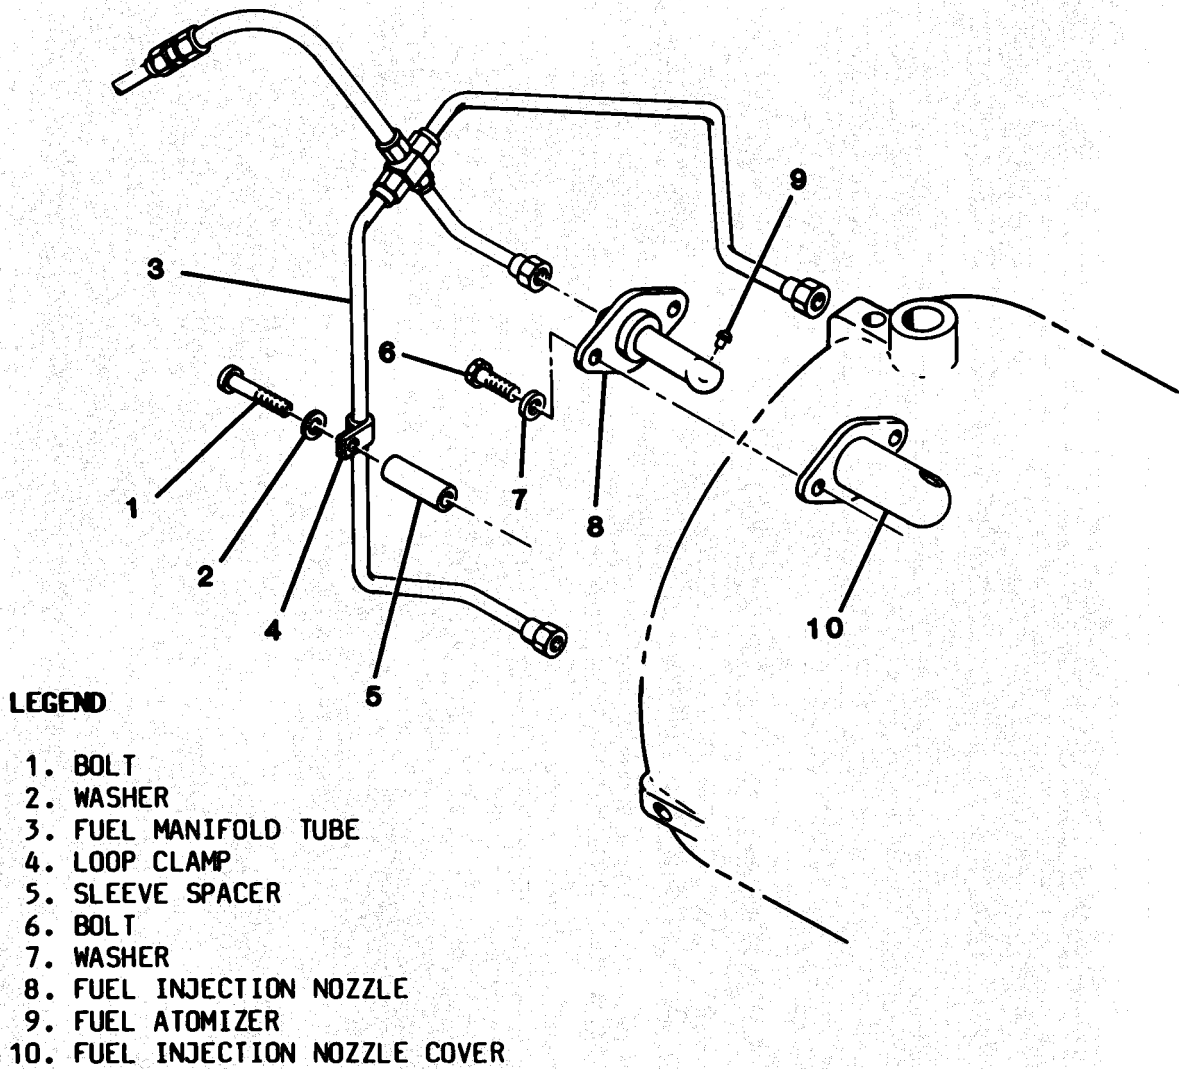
Combustor Housing Disassembly - Fuel Injection Nozzle Removal
